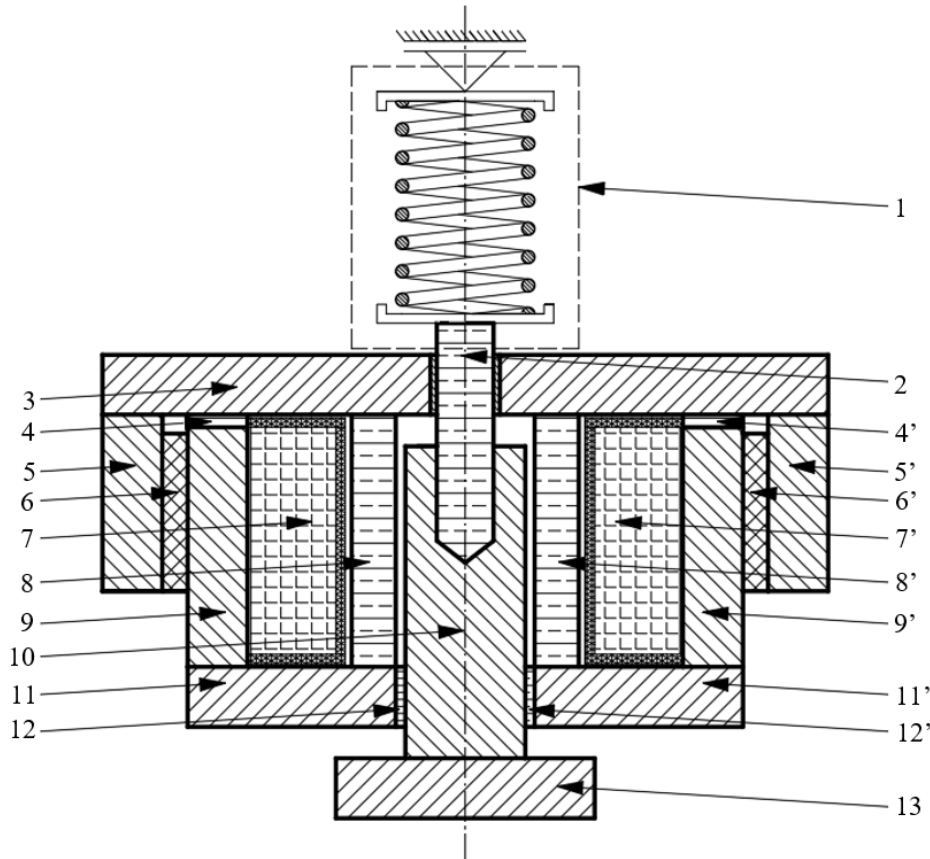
Technical assembly drawing (in section) of the electromagnetic actuator with permanent magnets
